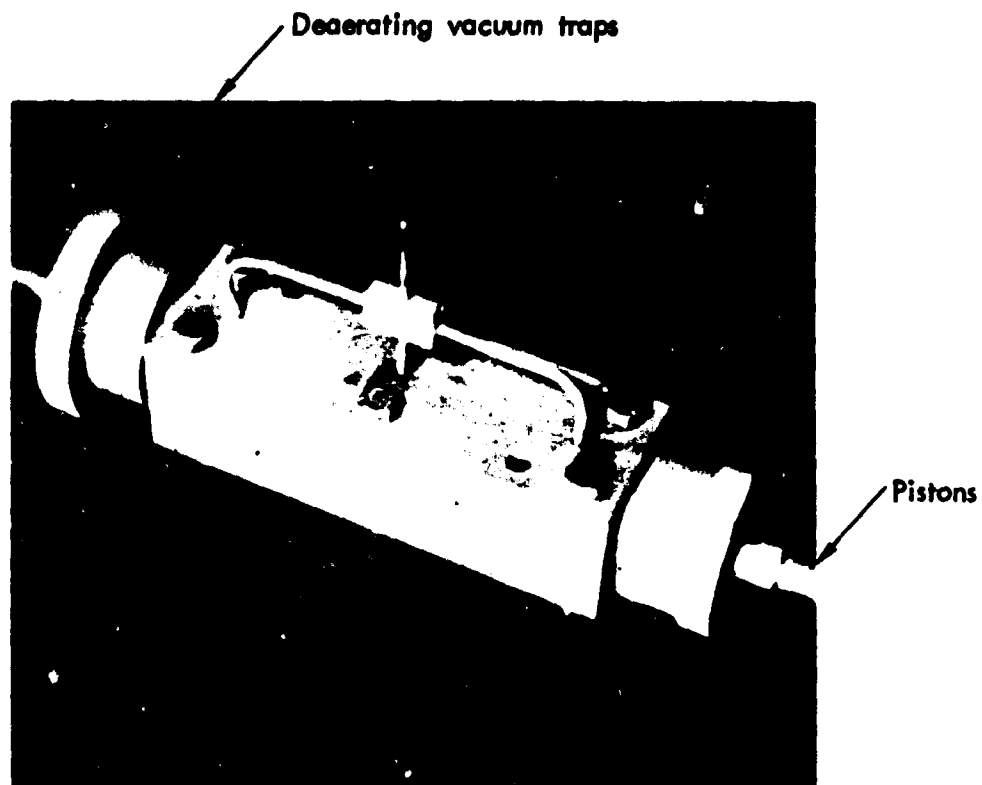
Two-piston mold for sintering camphor cylinders (1/2 in. diameter, 2 in. long), with provisions for deaerating prior to compression
